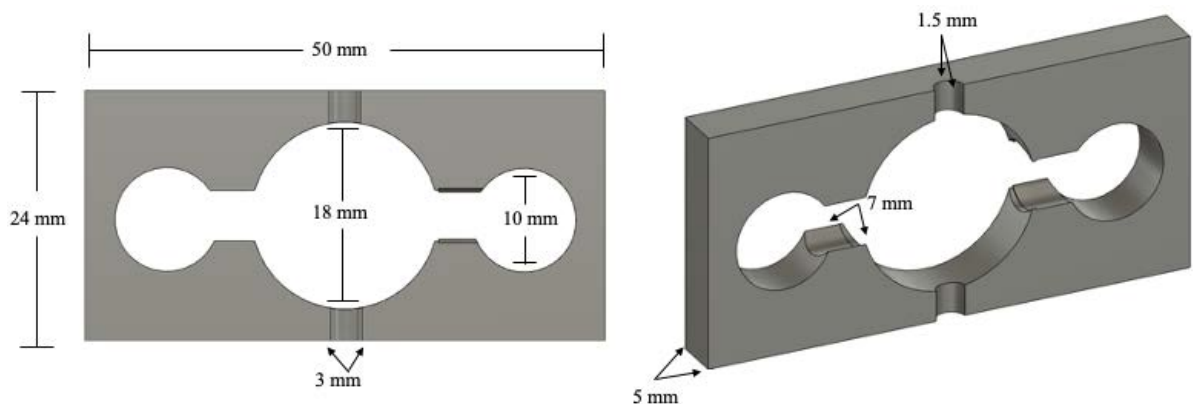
The CAD design of the slide spacer used for data acquisition, designed using Autodesk Fusion 360 and printed using a Lulzbot Taz6 3D printer.
